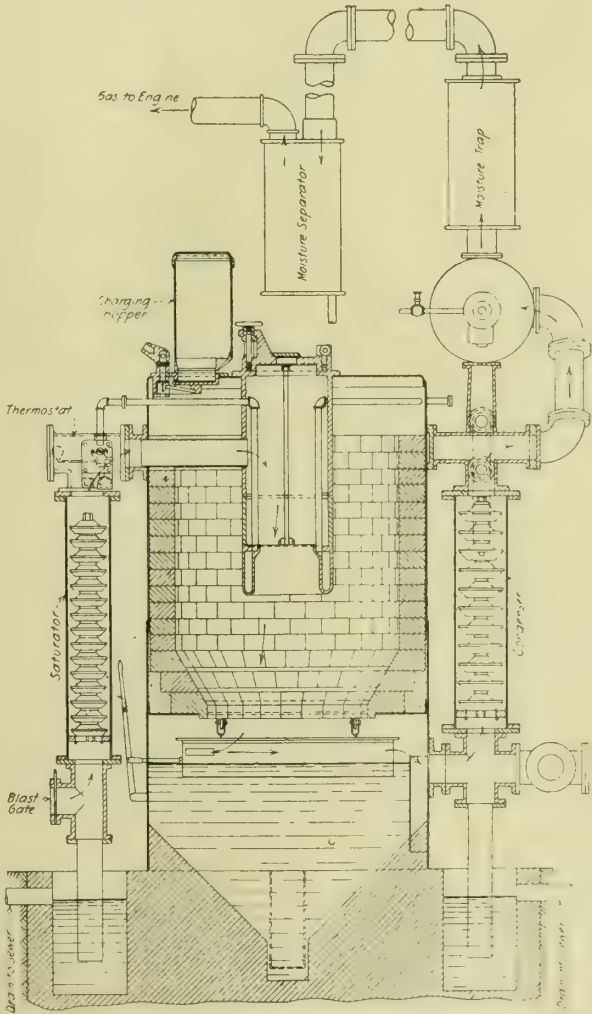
SECTIONAL VIEW OF GAS PRODUCER
